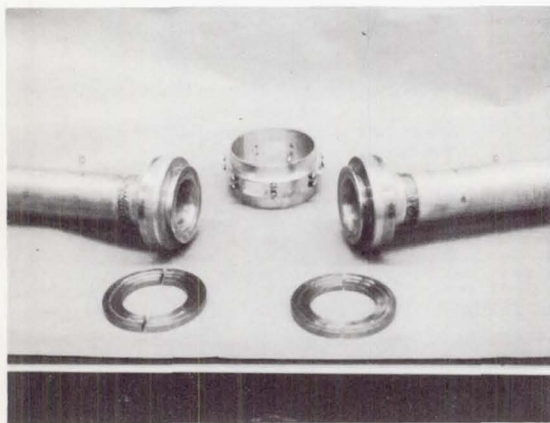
Integral Connector Flanges With 2S Aluminum Plates Welded to Them, Along With Retaining Ring and Split Dies
